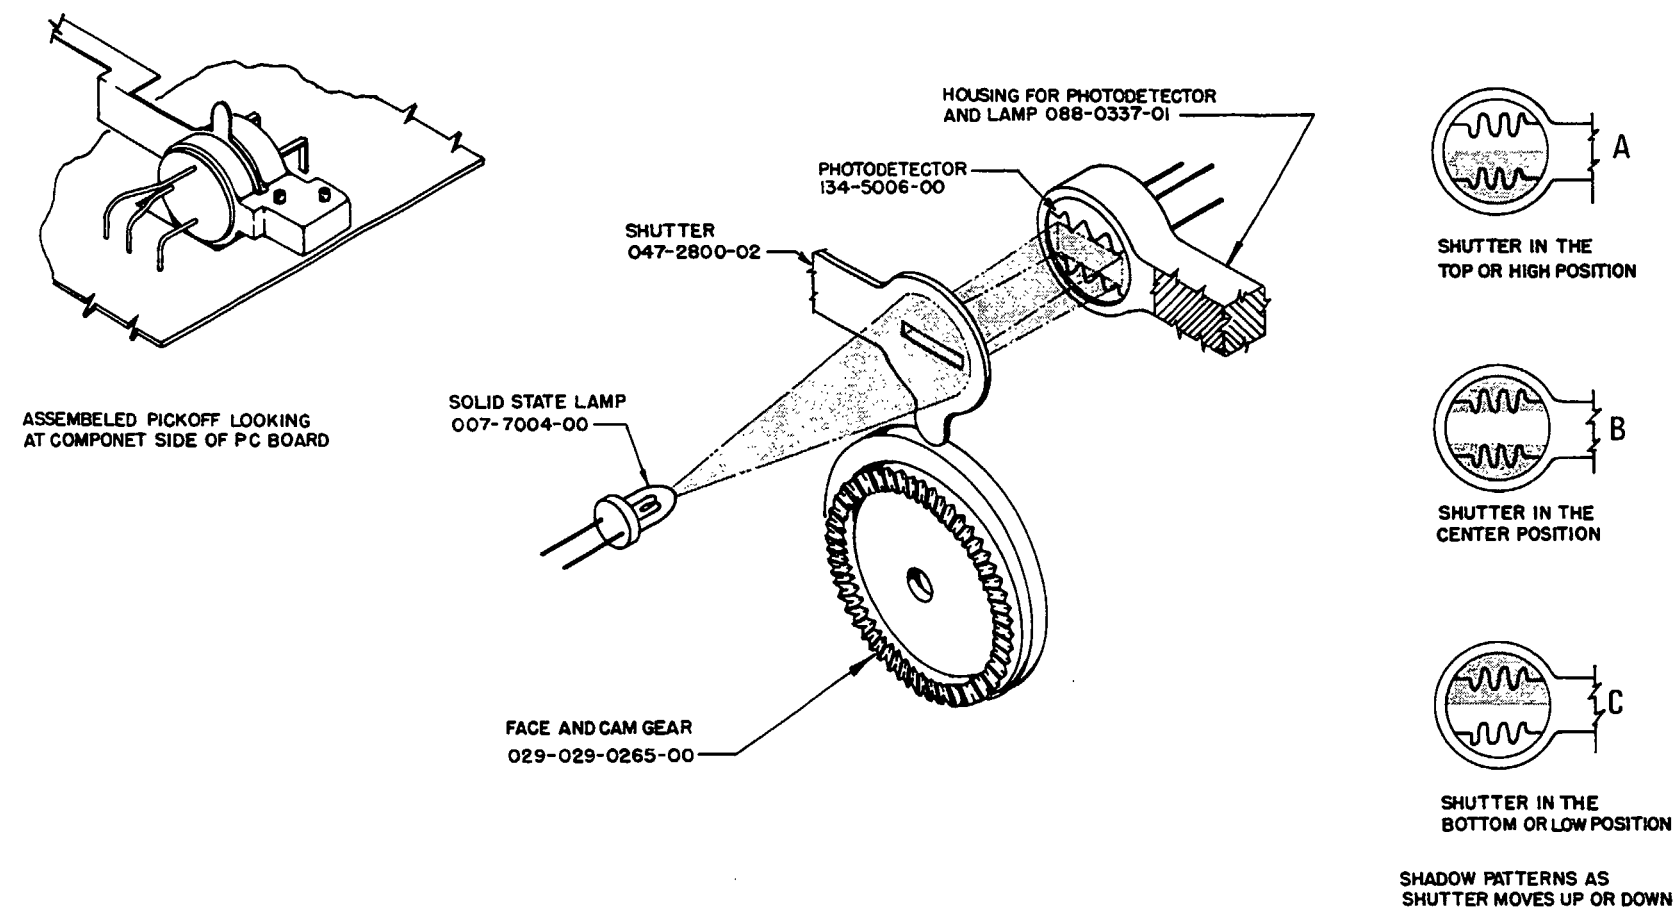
COURSE DATUM PICKOFF ASSEMBLY
